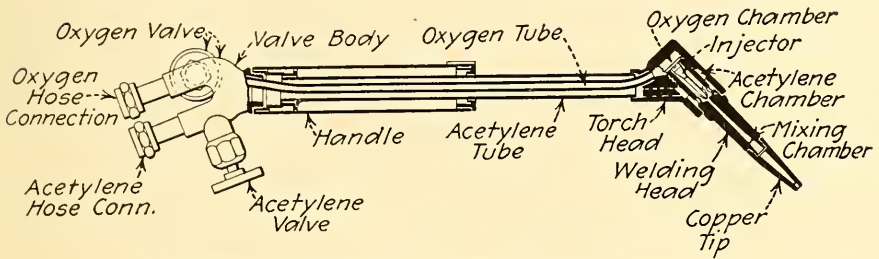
Details of the Oxweld Welding Torch.
